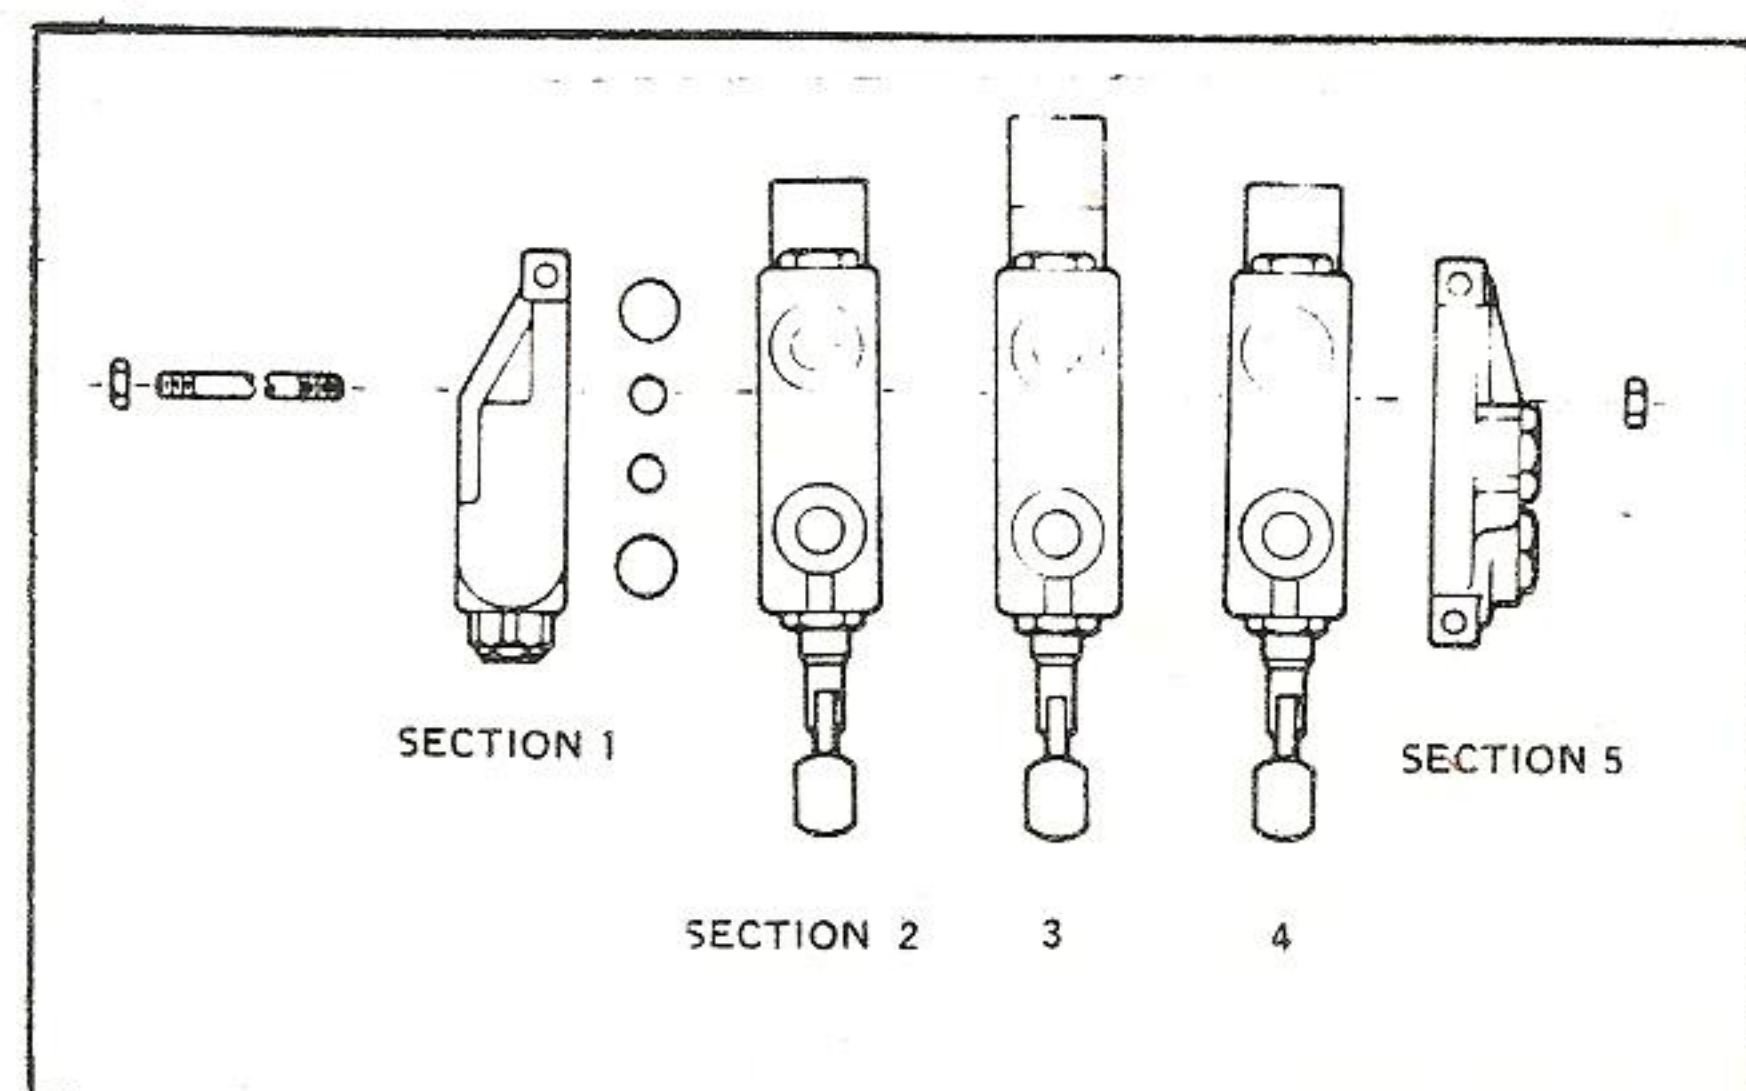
20. BUCKET CONTROL VALVE DISASSEMBLY
